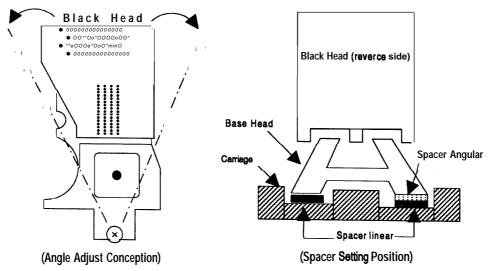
B-Head Angle and Linear, Angular Spacer
